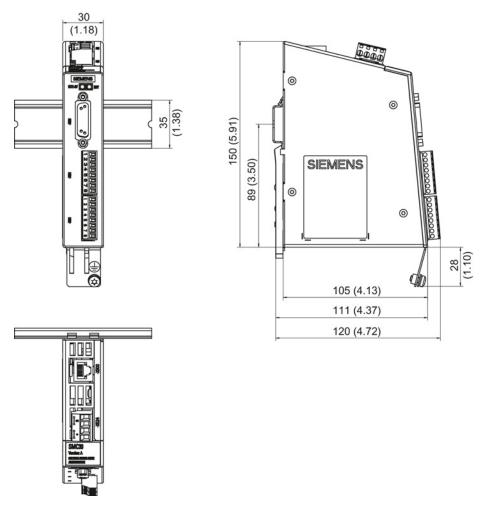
Dimension drawing of the Sensor Module Cabinet SMC30, all data in mm and (inches)
